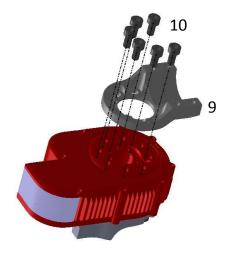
Attaching the Bottom Half of an Output Tube Adapter to the Assembly in Fig. 5
